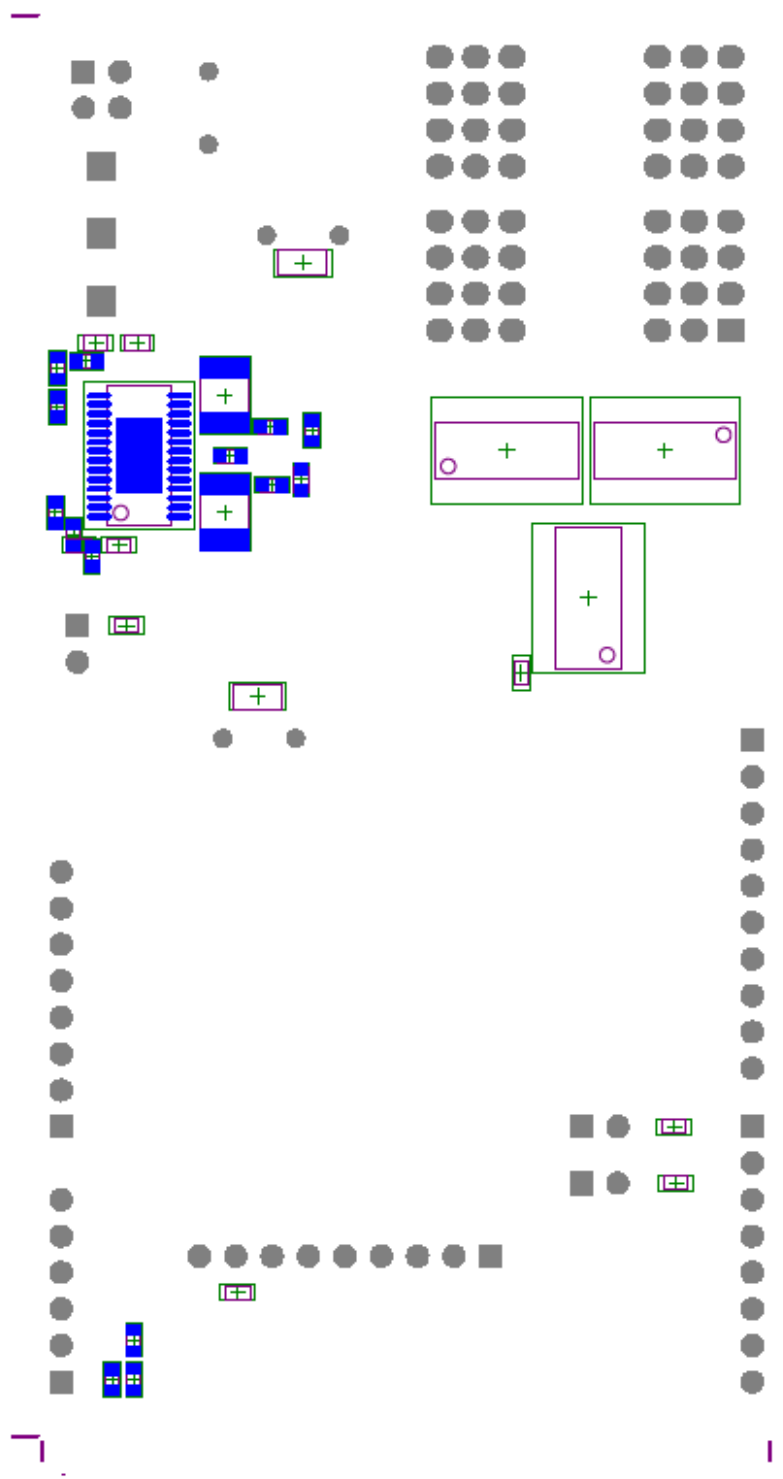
Prototype Rover Shield PCB - Bottom Pad Master
